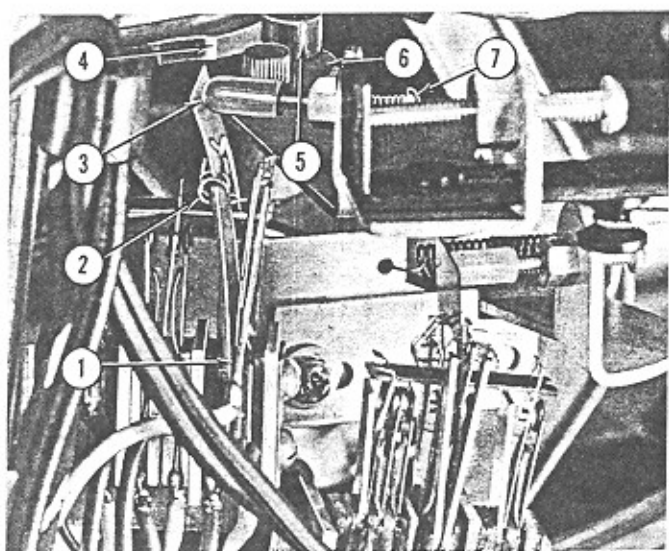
TRANSFER SWITCH ADJUSTMENT
